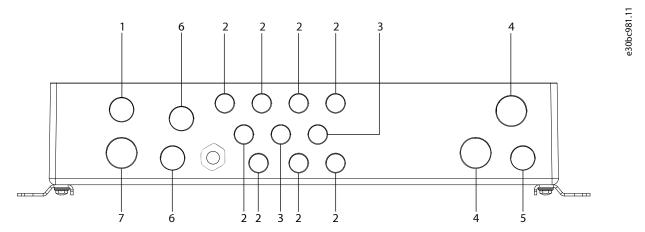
Cable Entry Holes - Large Unit, Standalone Mount
